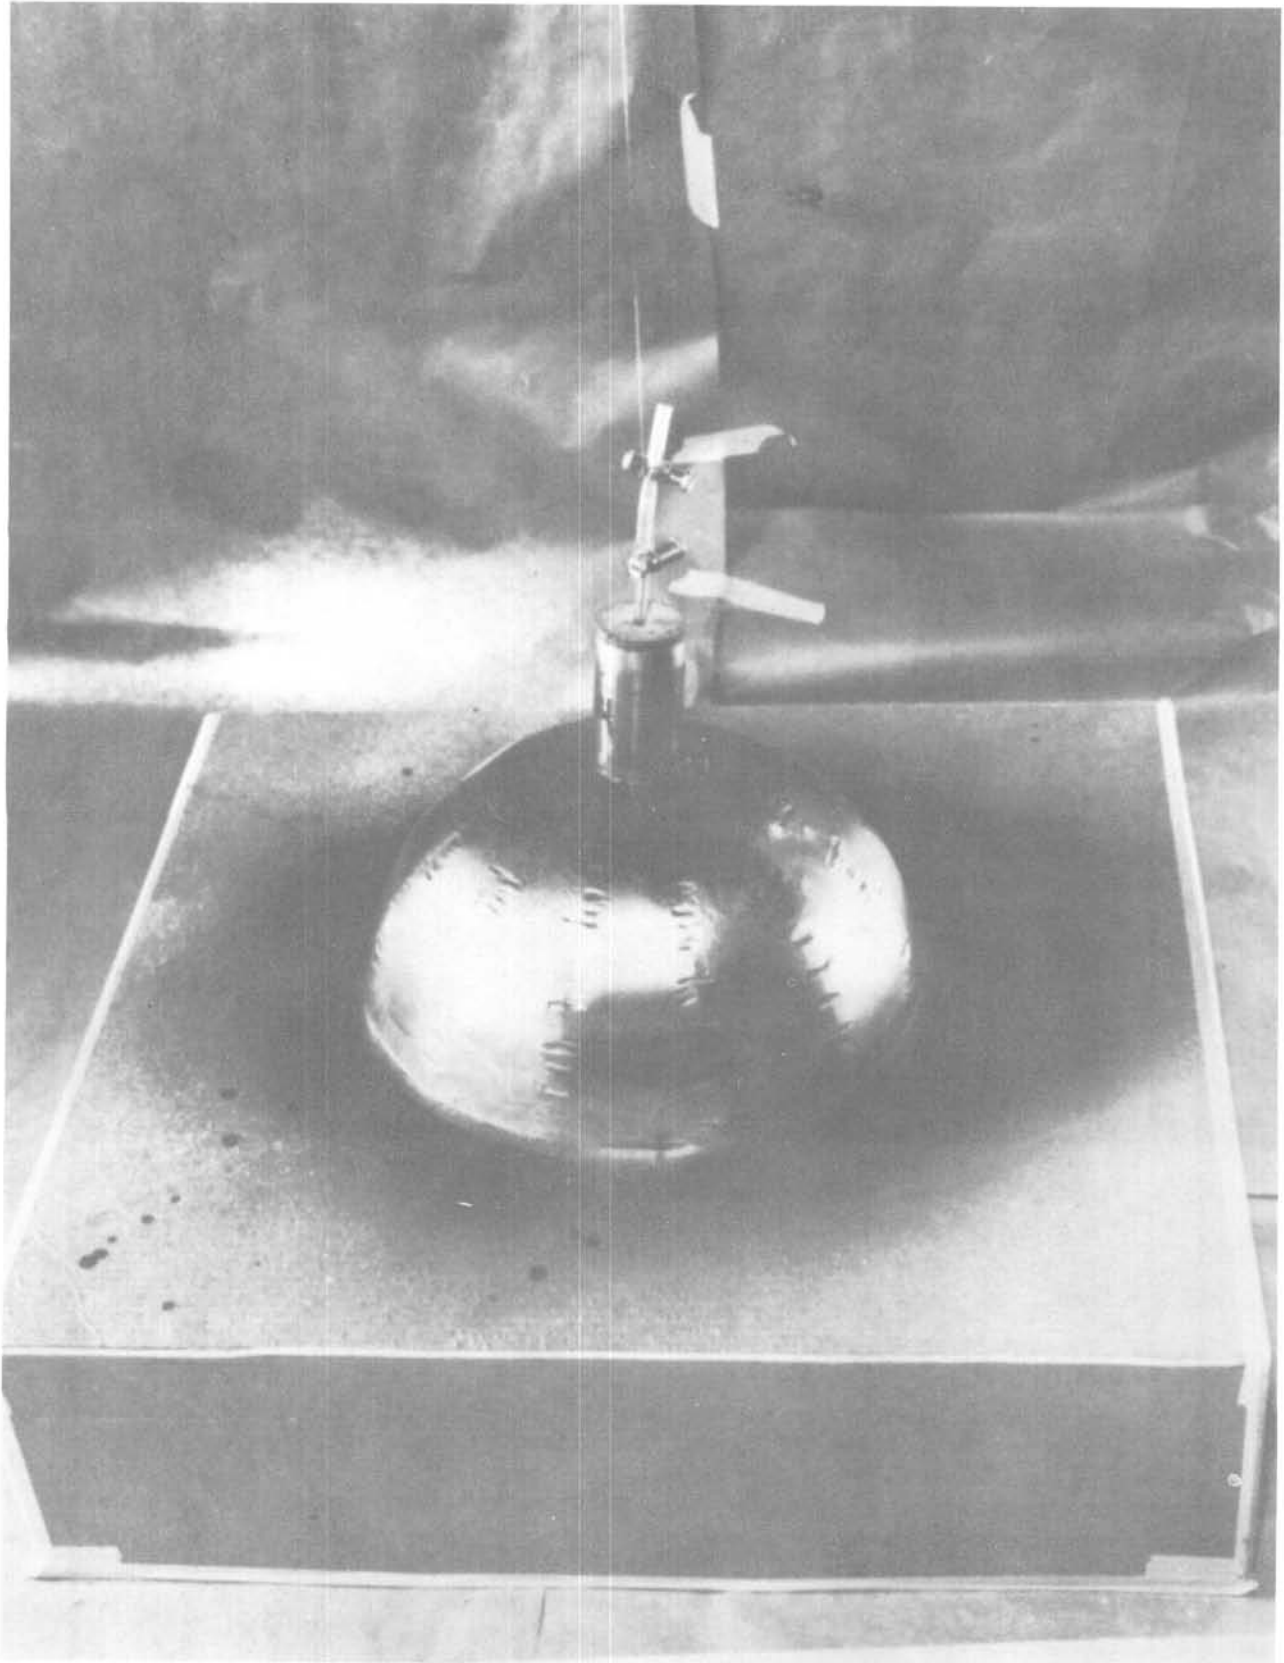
15-INCH-DIAMETER SPHERE COATING FIXTURE
